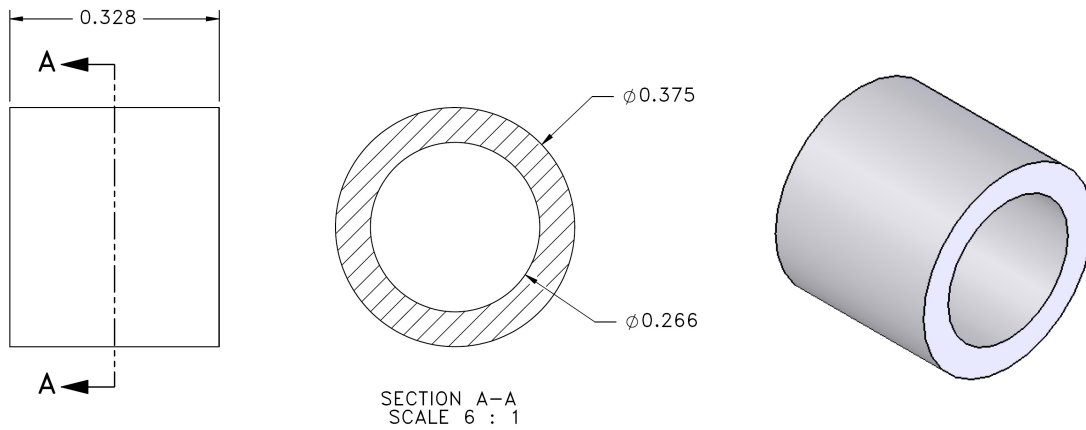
Technical drawing of one of the twelve RFA MACOR spacers. All measurements are in inches
